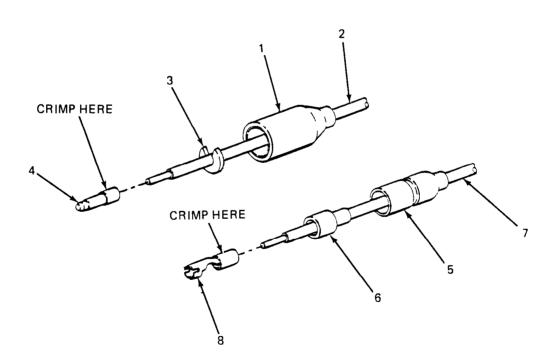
Taillight Cable Assembly and Electrical Lead Repair.
